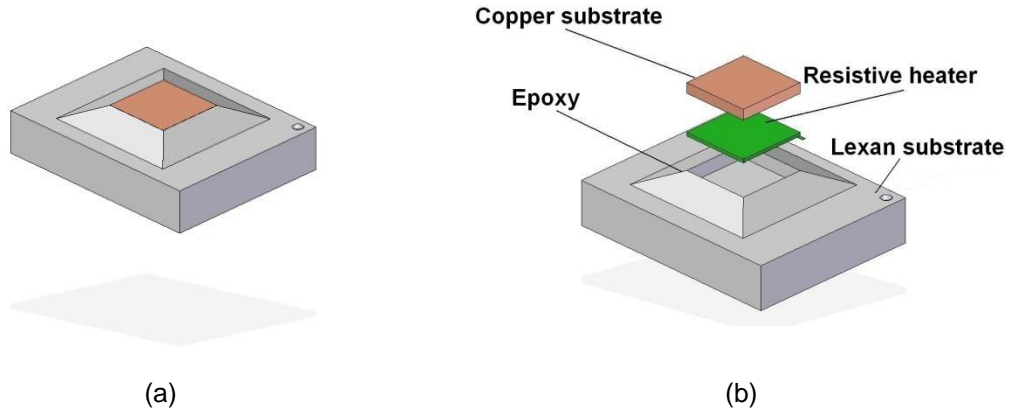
2cm x 2cm heater setup for (a) final heater and (b) exploded view
